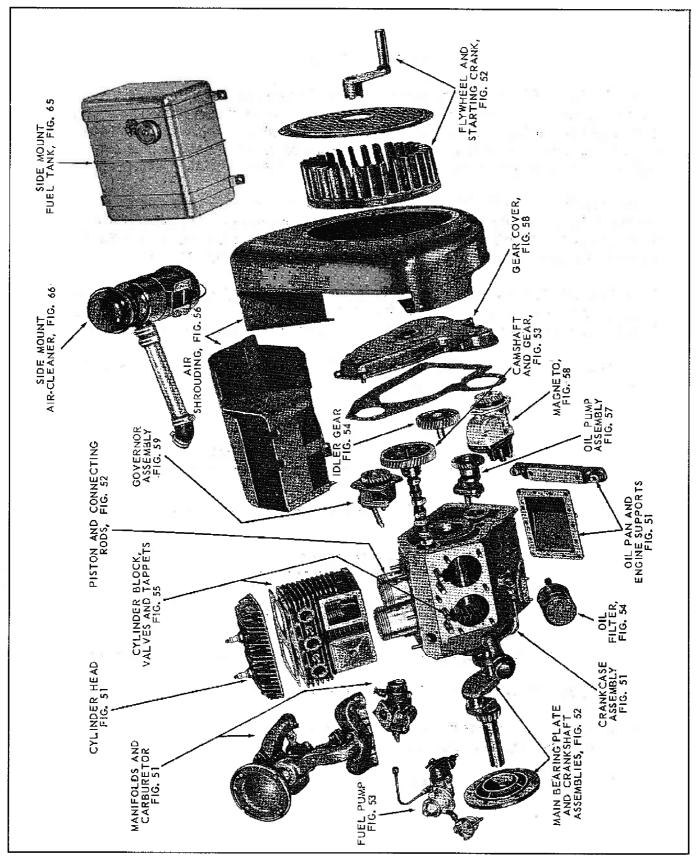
, EXPLODED VIEW OF ENGINE Refer to figure numbers for break down of parts.
